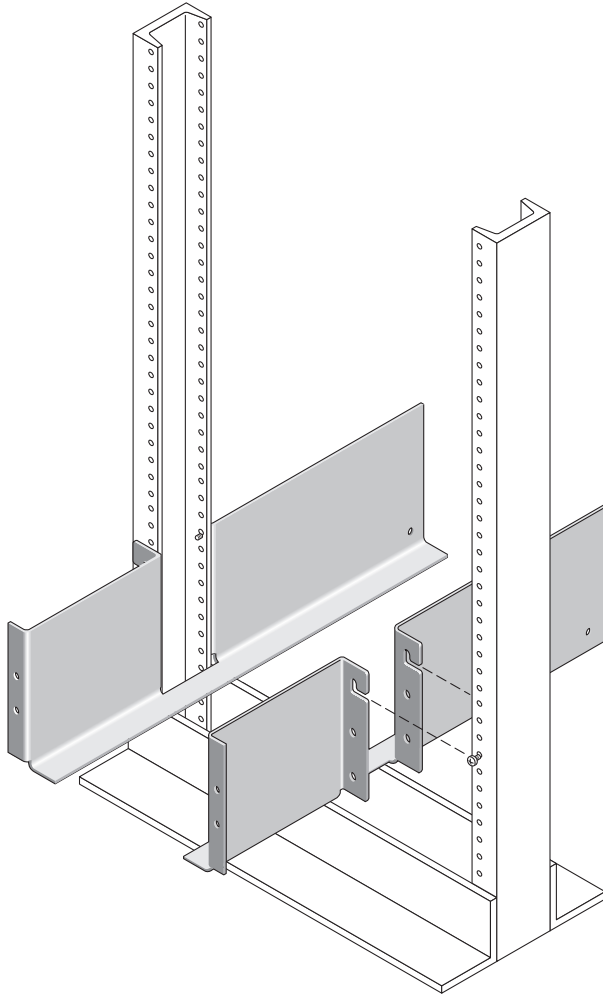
Seating the Mounting Rails Over the Front and Back Screws of the Telco 2-Post Rack
